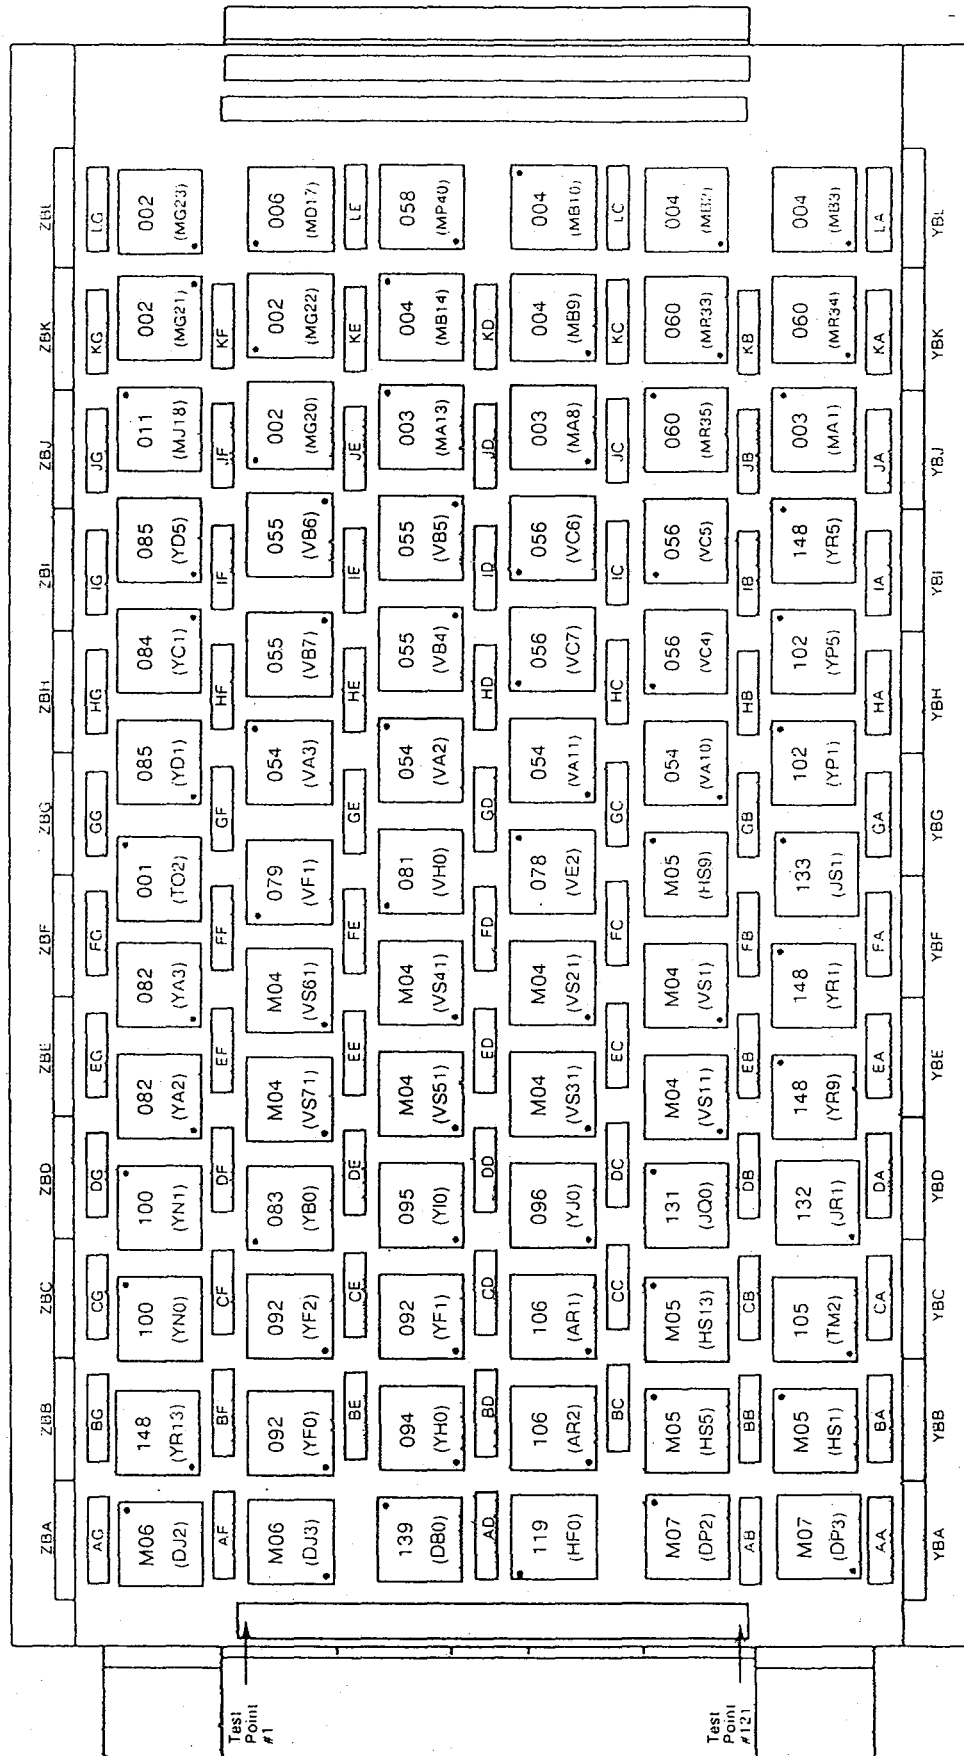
Sample of CPU Module Board A Layout Rev 4 (Sheet 1 of 4)
